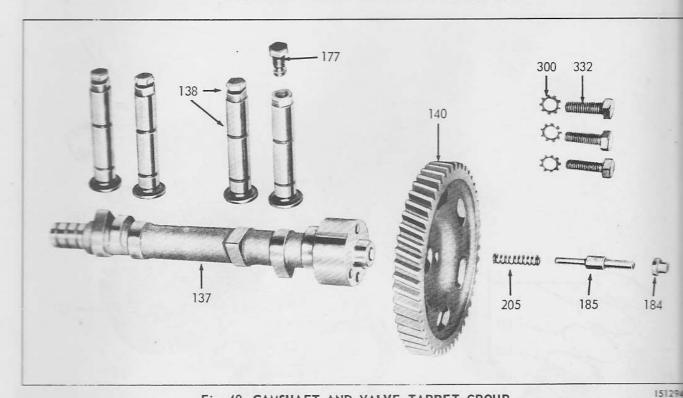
, CAMSHAFT AND VALVE TAPPET GROUP
